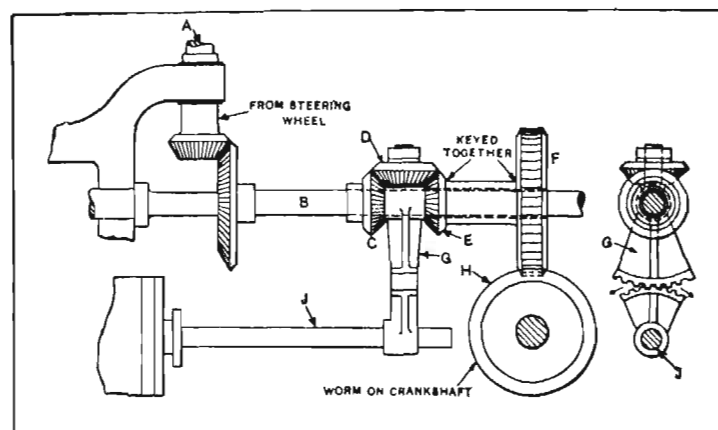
Steering Gear Control Mechanism Having Differential Bevel Gearing
